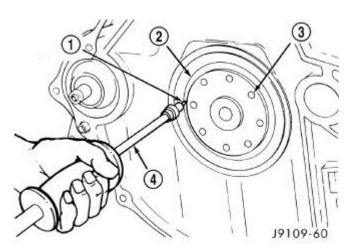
Crankshaft Rear Seal Removal Courtesy of CHRYSLER GROUP, LLC
